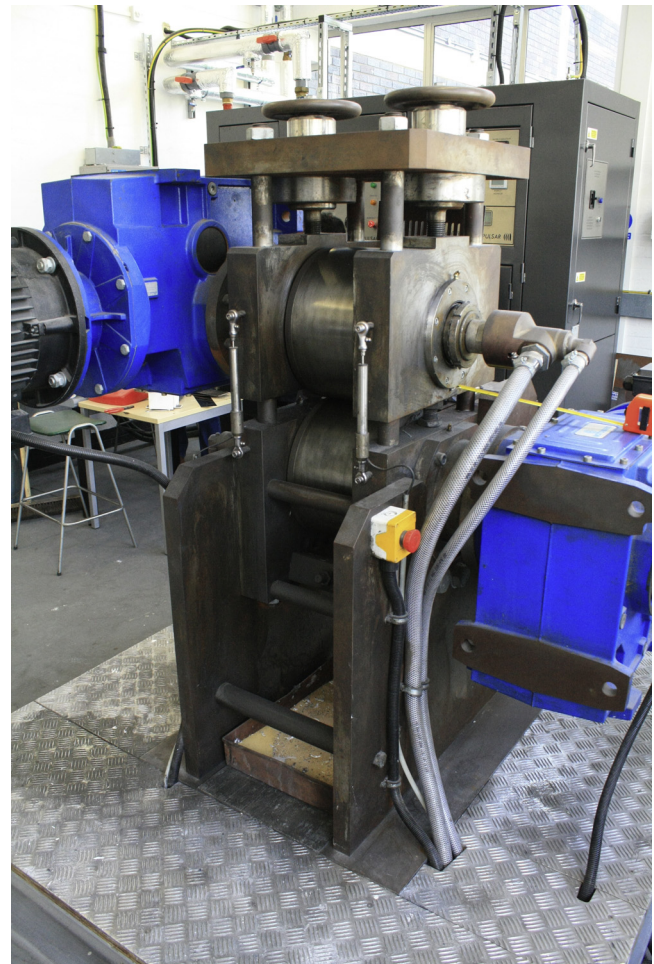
Horizontal twin roll caster at BCAST, Brunel University.
